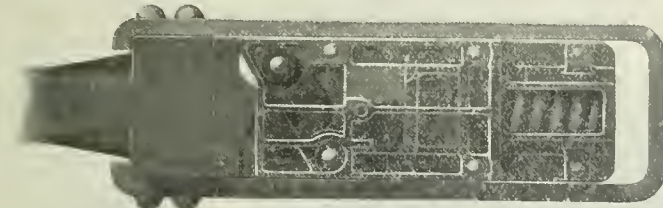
McCord Draft Gear Showing Position of the Moving Parts Under a Buffing Load of 250,000 lbs.
